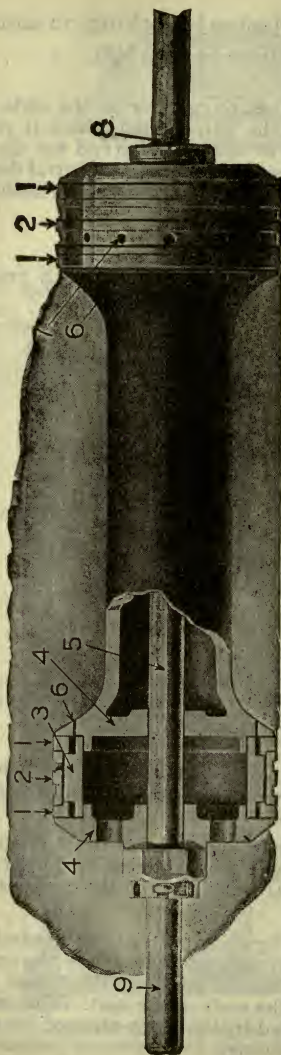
Reeves adjustable piston valve. The central portion of the valve, as shown in section, carries in each end a small bronze piston, small in diameter but very long and having water grooves cut as shown. It operates as follows: Steam from steam chest enters through one of the holes, back of piston, on the end of which is fastened a hardened steel plate. This piston is forced out toward the end of the valve against set screw, which is locked in place in the end of the toggle lever which carries a ring shoe on the end. This shoe has two bearings against the inner side of valve ring; the ring therefore, which is made eccentric, is expanded by the action of the piston, the pressure outward being sufficient to overcome the compression pressure in port which tends to collapse the valve ring. Ground joints are made between sides of valve ring and valve body and valve head. The outward pressure on valve ring is 15 per cent. in excess of compression pressure in the port, so that there is 15 per cent. of steam pressure always keeping the valve ring steam tight and in contact with seat, taking up any wear. In case an excessive pressure, such as is caused by a shot of water, the valve ring will collapse and would relieve the cylinder as much as is possible of excessive pressure.
